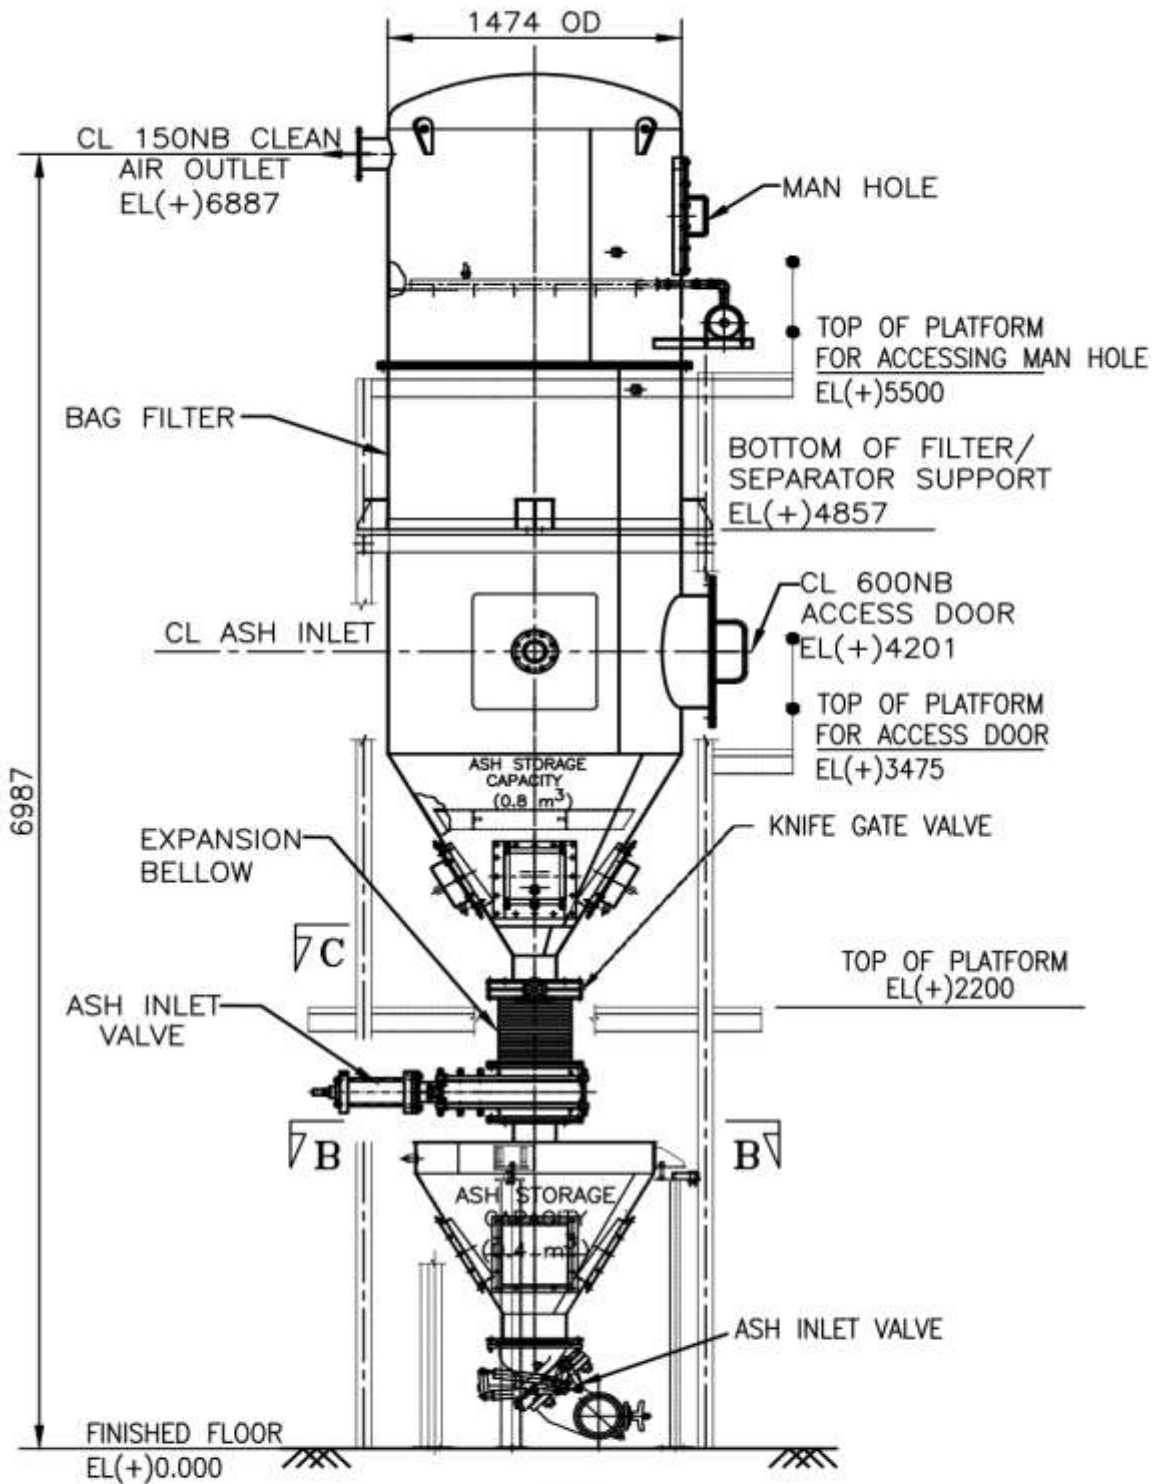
Stacked-up system assembly of the negative pressure pneumatic conveying test rig
